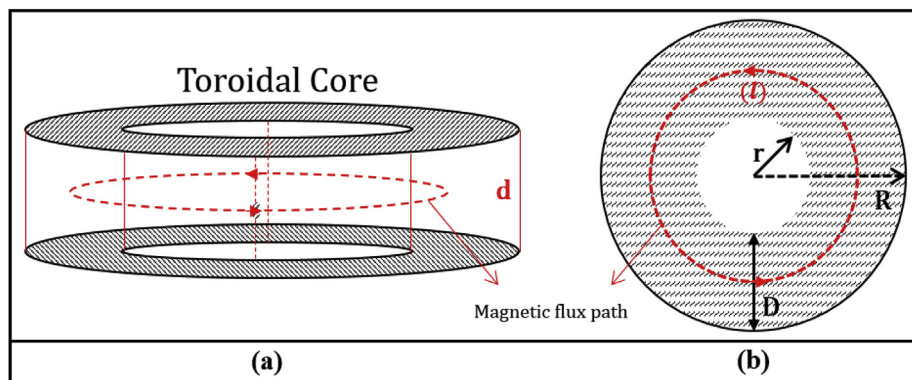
Produced core dimensions. Appearance from the side view (a) and the top view (b).
